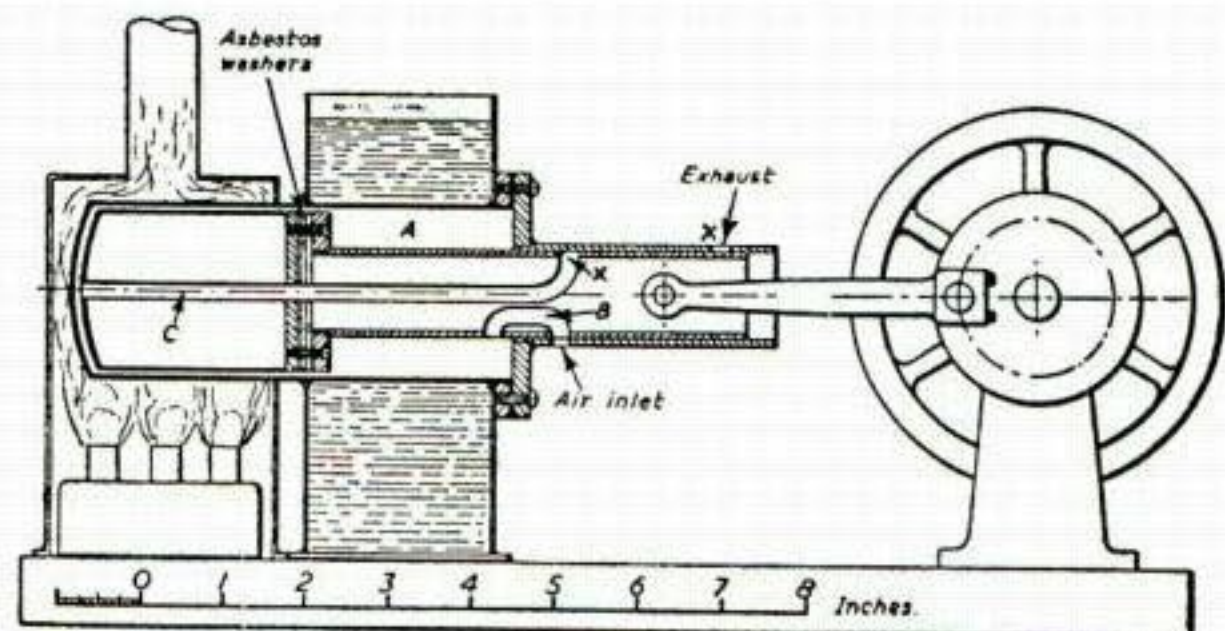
This sectional view of the hot-air engine shows the simplicity of the design.
